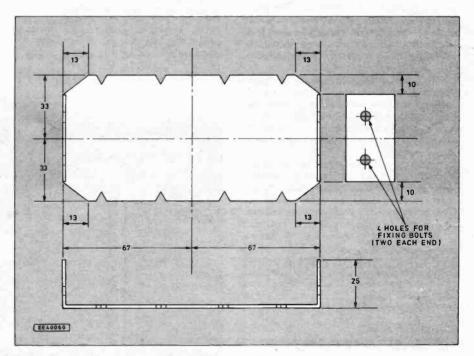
Approximate shape of metal chassis which should be cut and drilled to fit into the battery compartment. Dimensions are in millimetres.
